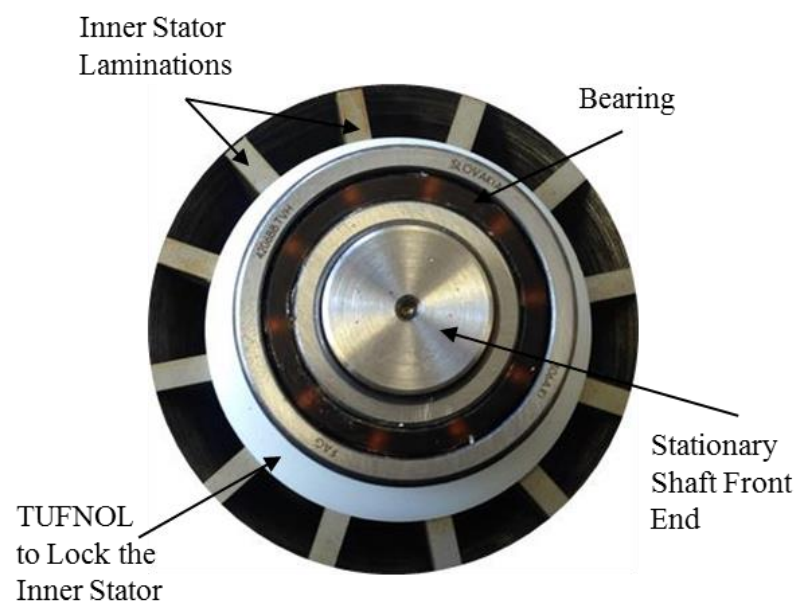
Cross Section of the Inner Stator Laminations Stack with a TUFNOL and Bearing to Lock it.
